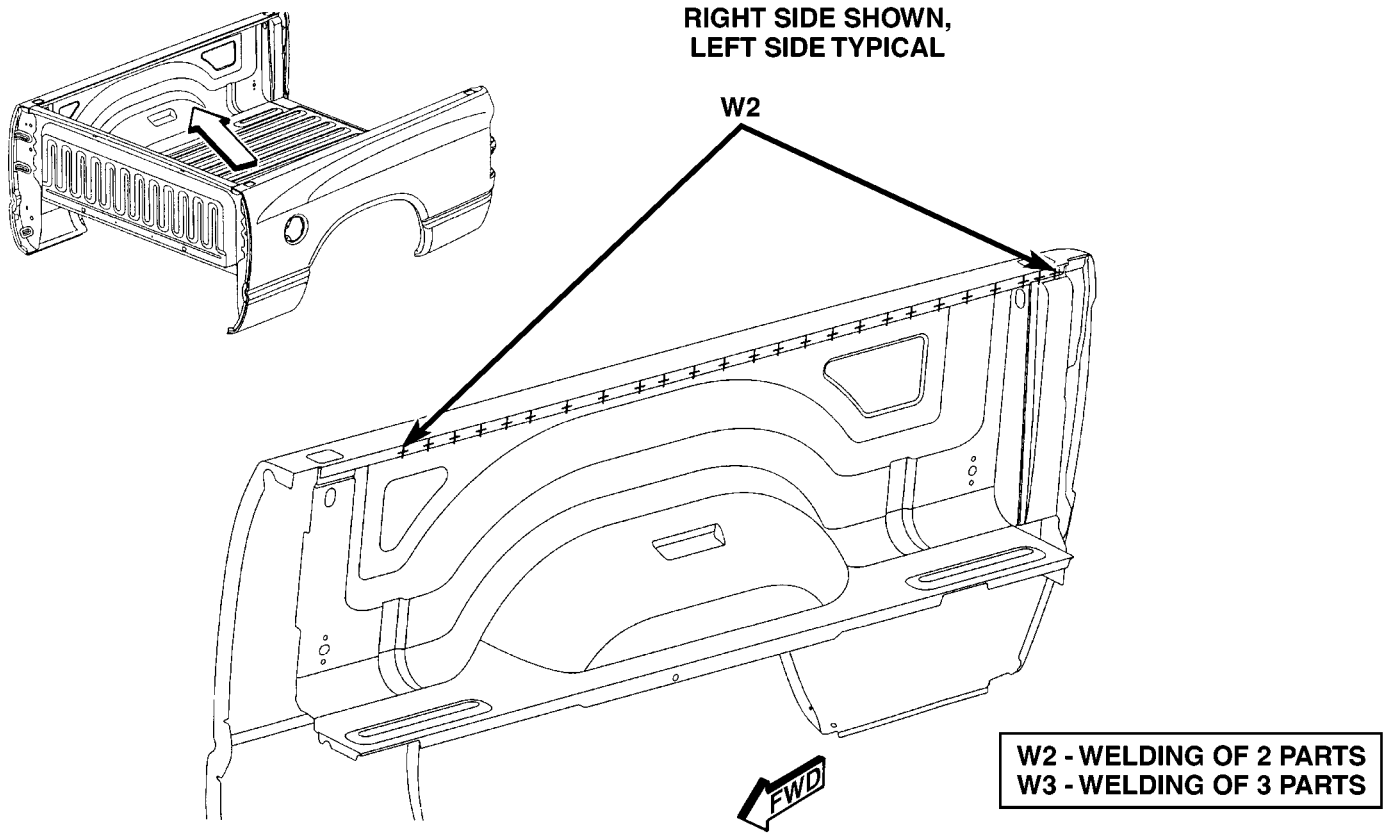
INNER BOX SIDE PANEL - SHORT CARGO BOX ONLY
